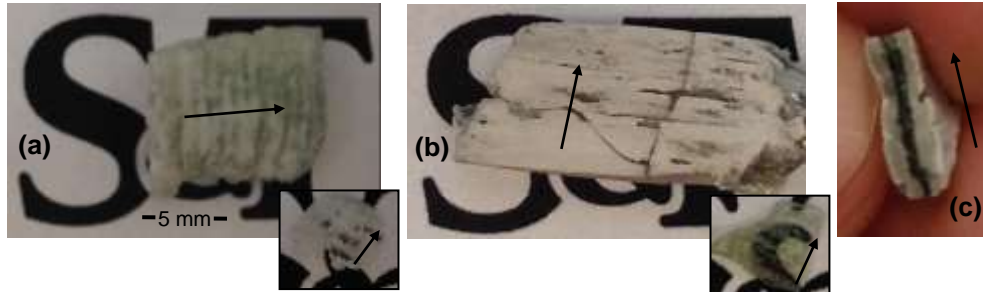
Wall built using powder bed process (a) 1 mm layer thickness (b) 0.5 mm layer thickness and (c) side view of 0.5 mm parts. Photographs are as deposited while insets show a portion of the same parts after cutting and polishing. The arrows indicate the build direction.
